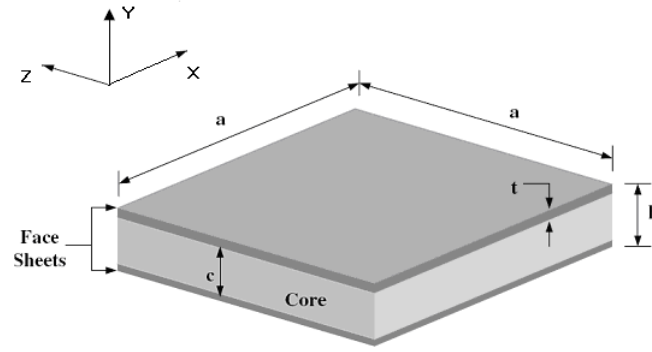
Layout of a sandwich beam, (Vinson, 1999)
